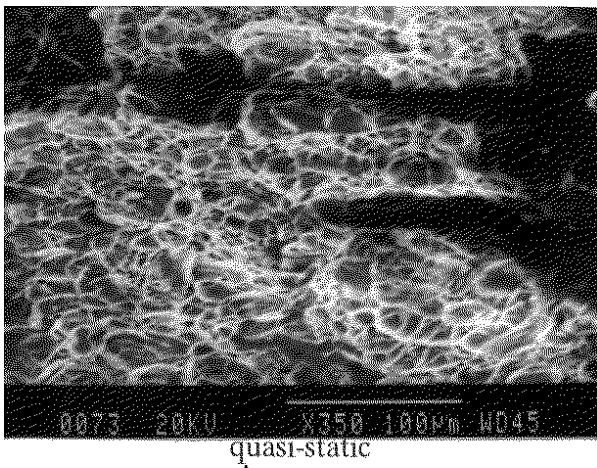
Fracture surfaces of specimens with 2 mm notch radius.
